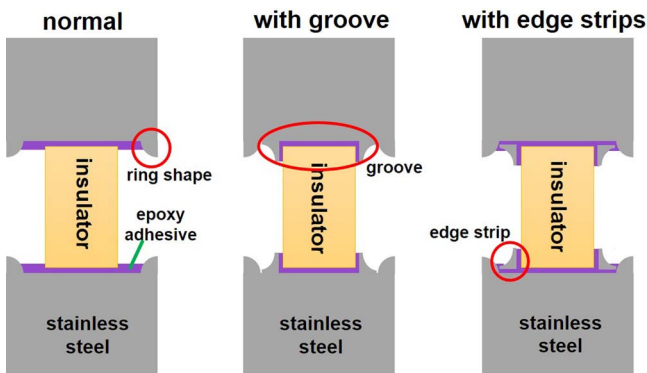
Mechanical shapes of different supporting flange designs: normal, with groove and with edge strips. The groove is directly machined and formed on the stainless steel, but the edge strips are bonded on the surface with the epoxy adhesive.
